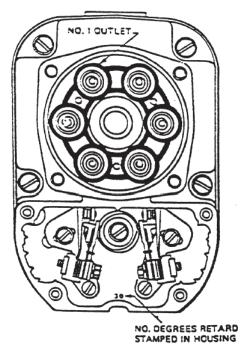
Cam End of Dual Contact Assembly Magneto
